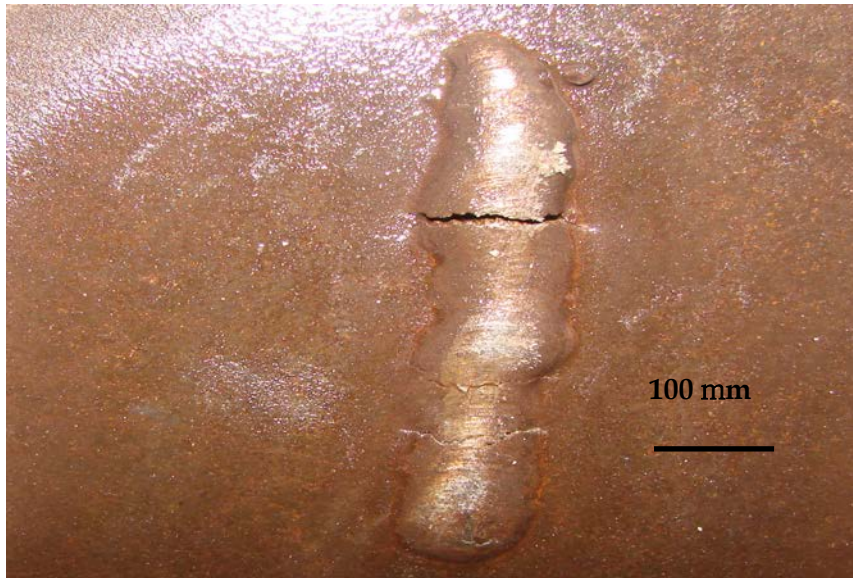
Minor cracked in steel B (hard facing deposit and steel HAZ) after 4th blast.
